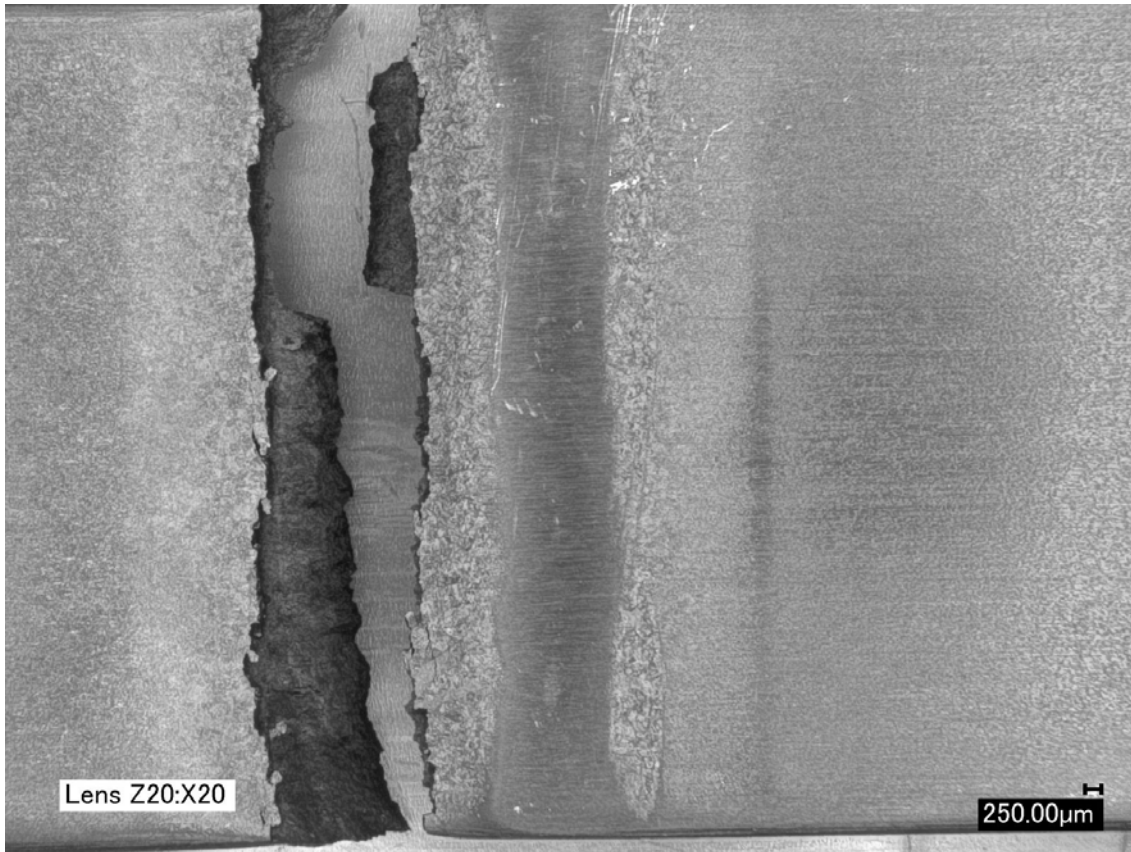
Example of fracture location in Ti-834 welded sheet LCF specimens
